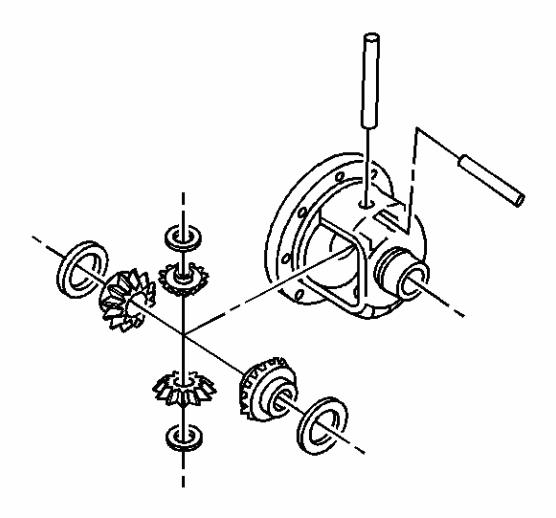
Exploded View Of Differential Case Courtesy of GENERAL MOTORS CORP.
